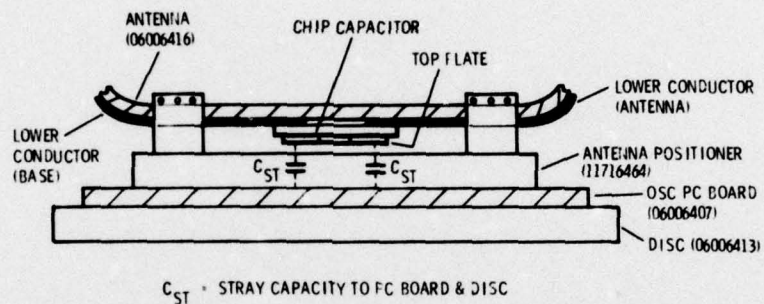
Partial Side View of Oscillator Assembly (Dwg No. 06006415)
